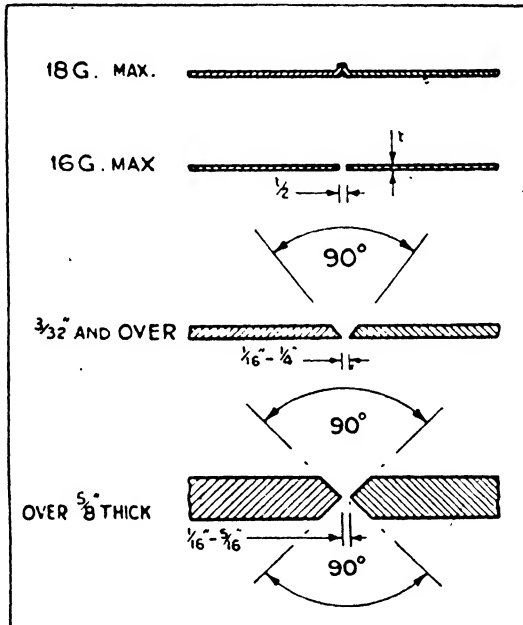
EDGE PREPARATION FOR COPPER UNDERHAND WELDING
